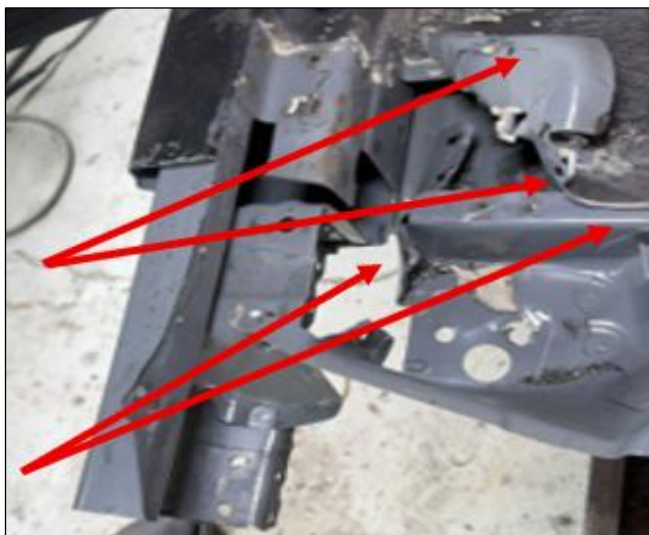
In this Mitsubishi inner rear quarter replacement procedure example, the predominant welding method specified is GMA-MIG/MAG welding.
